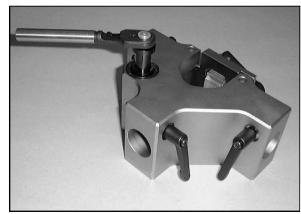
CENTER MODULE OF UNIVERSAL CLAMPING DEVICE
